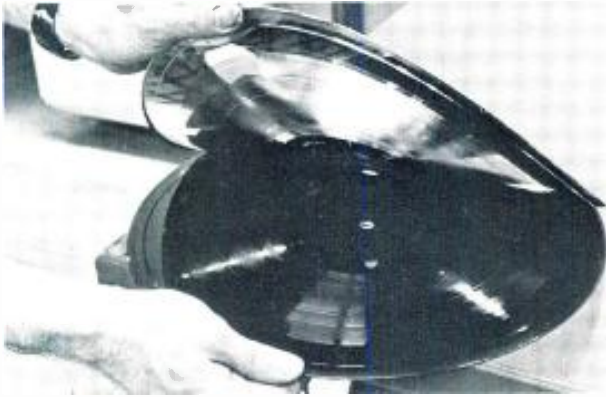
The silver master is stripped away from the lacquer, forming the first mold made from the cutting surface. This silver master will now go through an electroplating process to make the next mold. This new mold is the mother.
